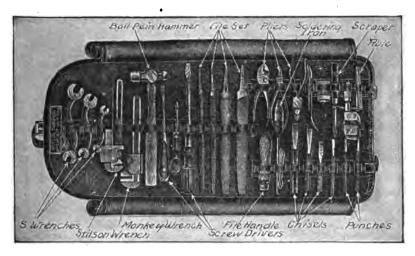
Complete Tool Outfit For Repairing Motor Car Mechanism That Occupies But Little Space.
